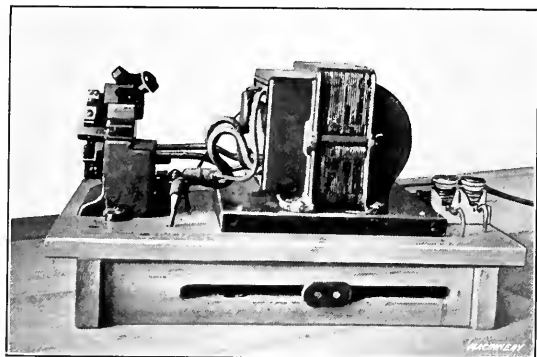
Example of Unit Equipment for soldering Optical Frames
